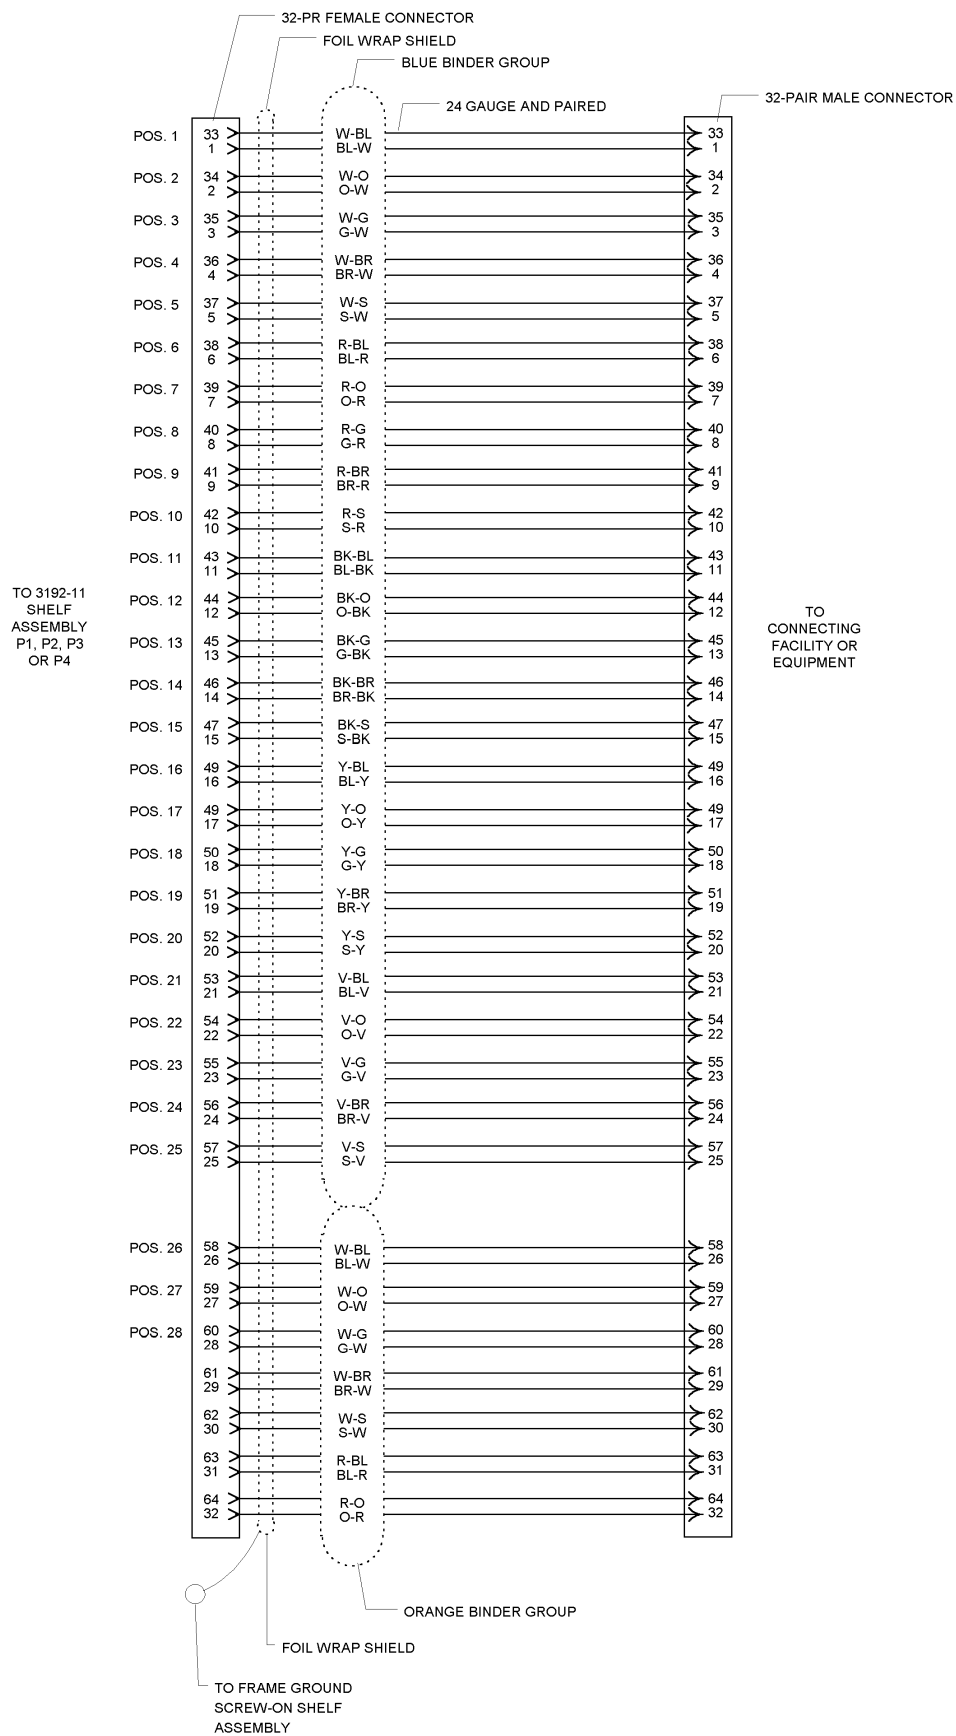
32 Pair Male-Female Cable Assembly 03-2973XX-0 Wiring Diagram
